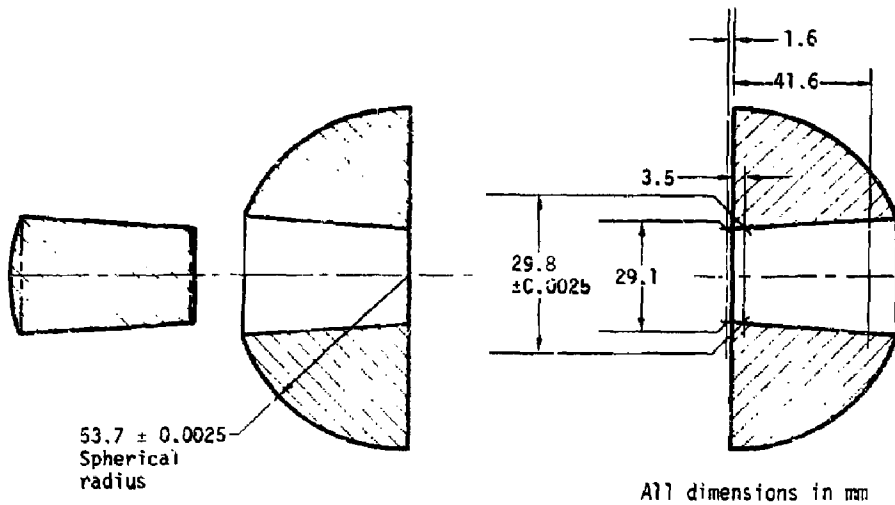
Machining specifications for the plutonium sphere. The finish was 63FAO unless otherwise specified. (Taken from LLL drawings AAA 76-115268-00, 76-115276-00, and 76-113295-08).
